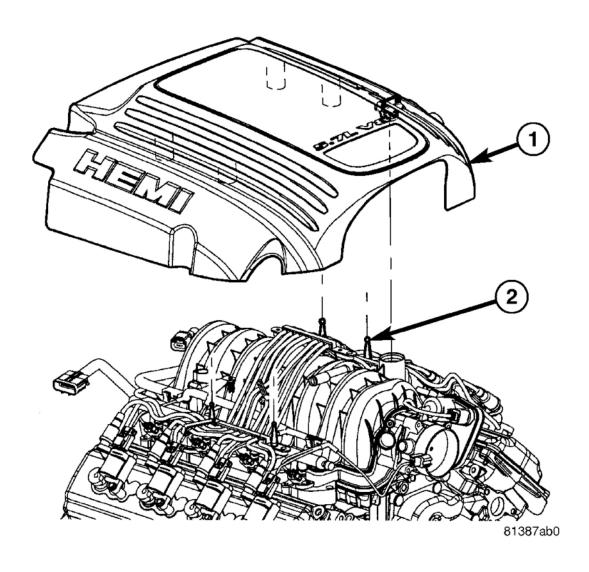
Engine Cover Courtesy of CHRYSLER LLC
